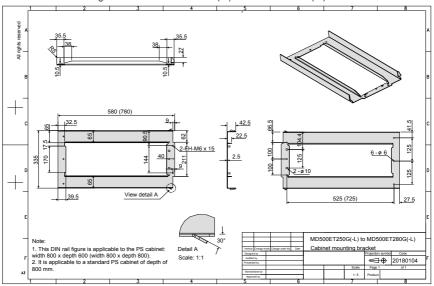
Dimensions of mounting bracket of MD500ET250G(-L) to MD500ET280G(-L) (factory standard)
